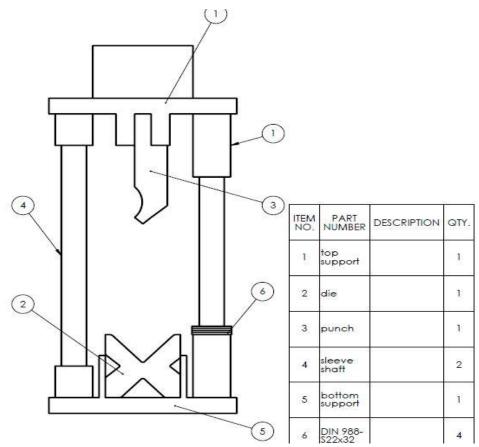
Schematic drawing of the whole fixture and die and punch assembly.
